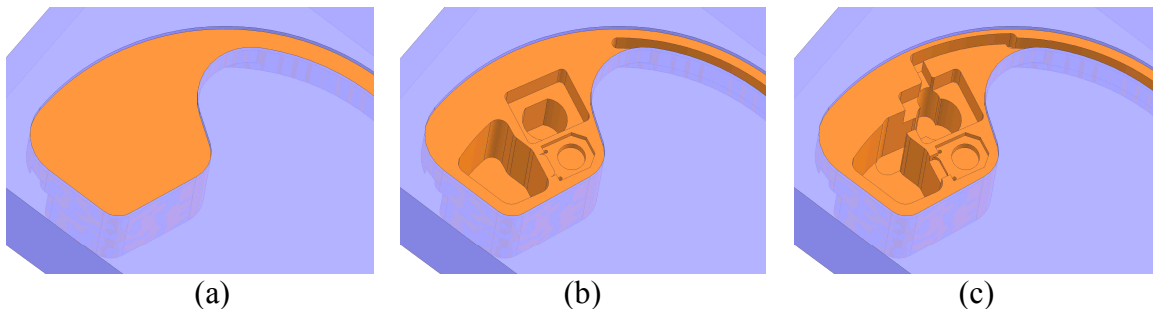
Pour 1 (a), with machined pockets (b), and with wiring channels (c).
